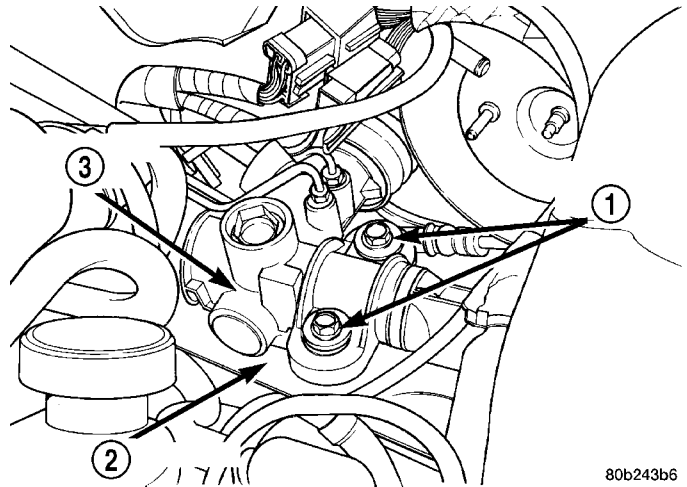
Steering Gear Attachment To Crossmember (Left Side)
